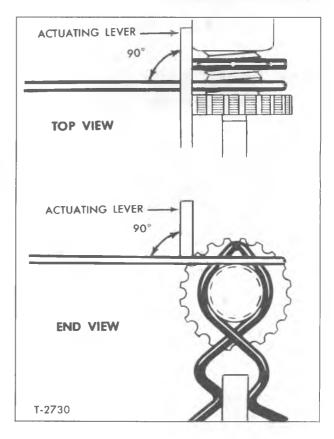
Wire Gauge Position for Correct Adjusting Lever Adjustment
